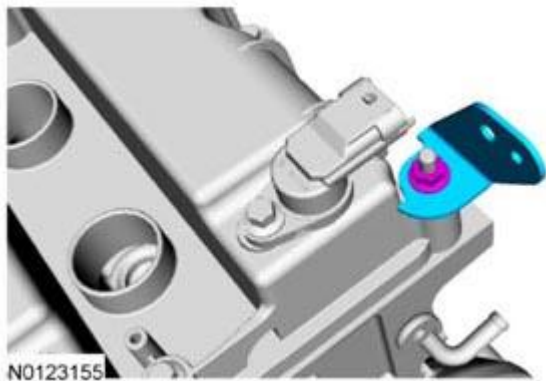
Identifying Heated Oxygen Sensor (HO2S) Electrical Connector Bracket And Nut
